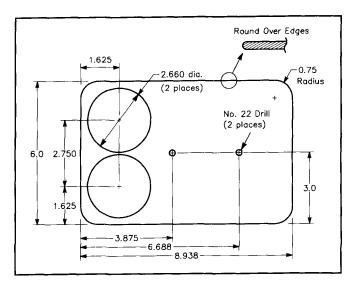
Plate stripline for the parallel 3CX800A7 amplifier is made of 1/16-in. copper or brass. Nickel-less (dull-finish) silver plating is recommended after the plate collets are soldered in place.
